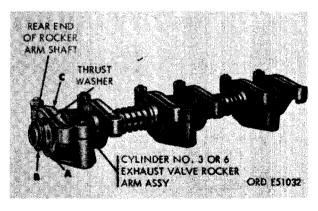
REMOVING OR INSTALLING CYLINDER NO. 3 (OR 6) EXHAUST VALVE ROCKER ARM ASSEMBLY.
